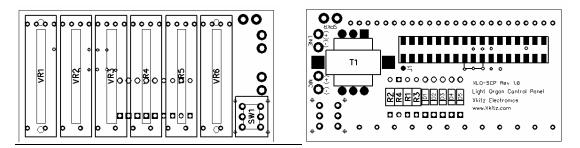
Parts Placement Diagram (Inner PCB, Front and Back)
